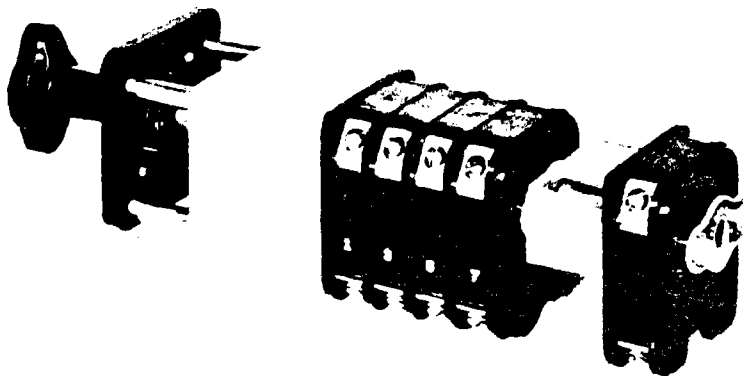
View of Type SBM Switch with Additional Stage in Position
